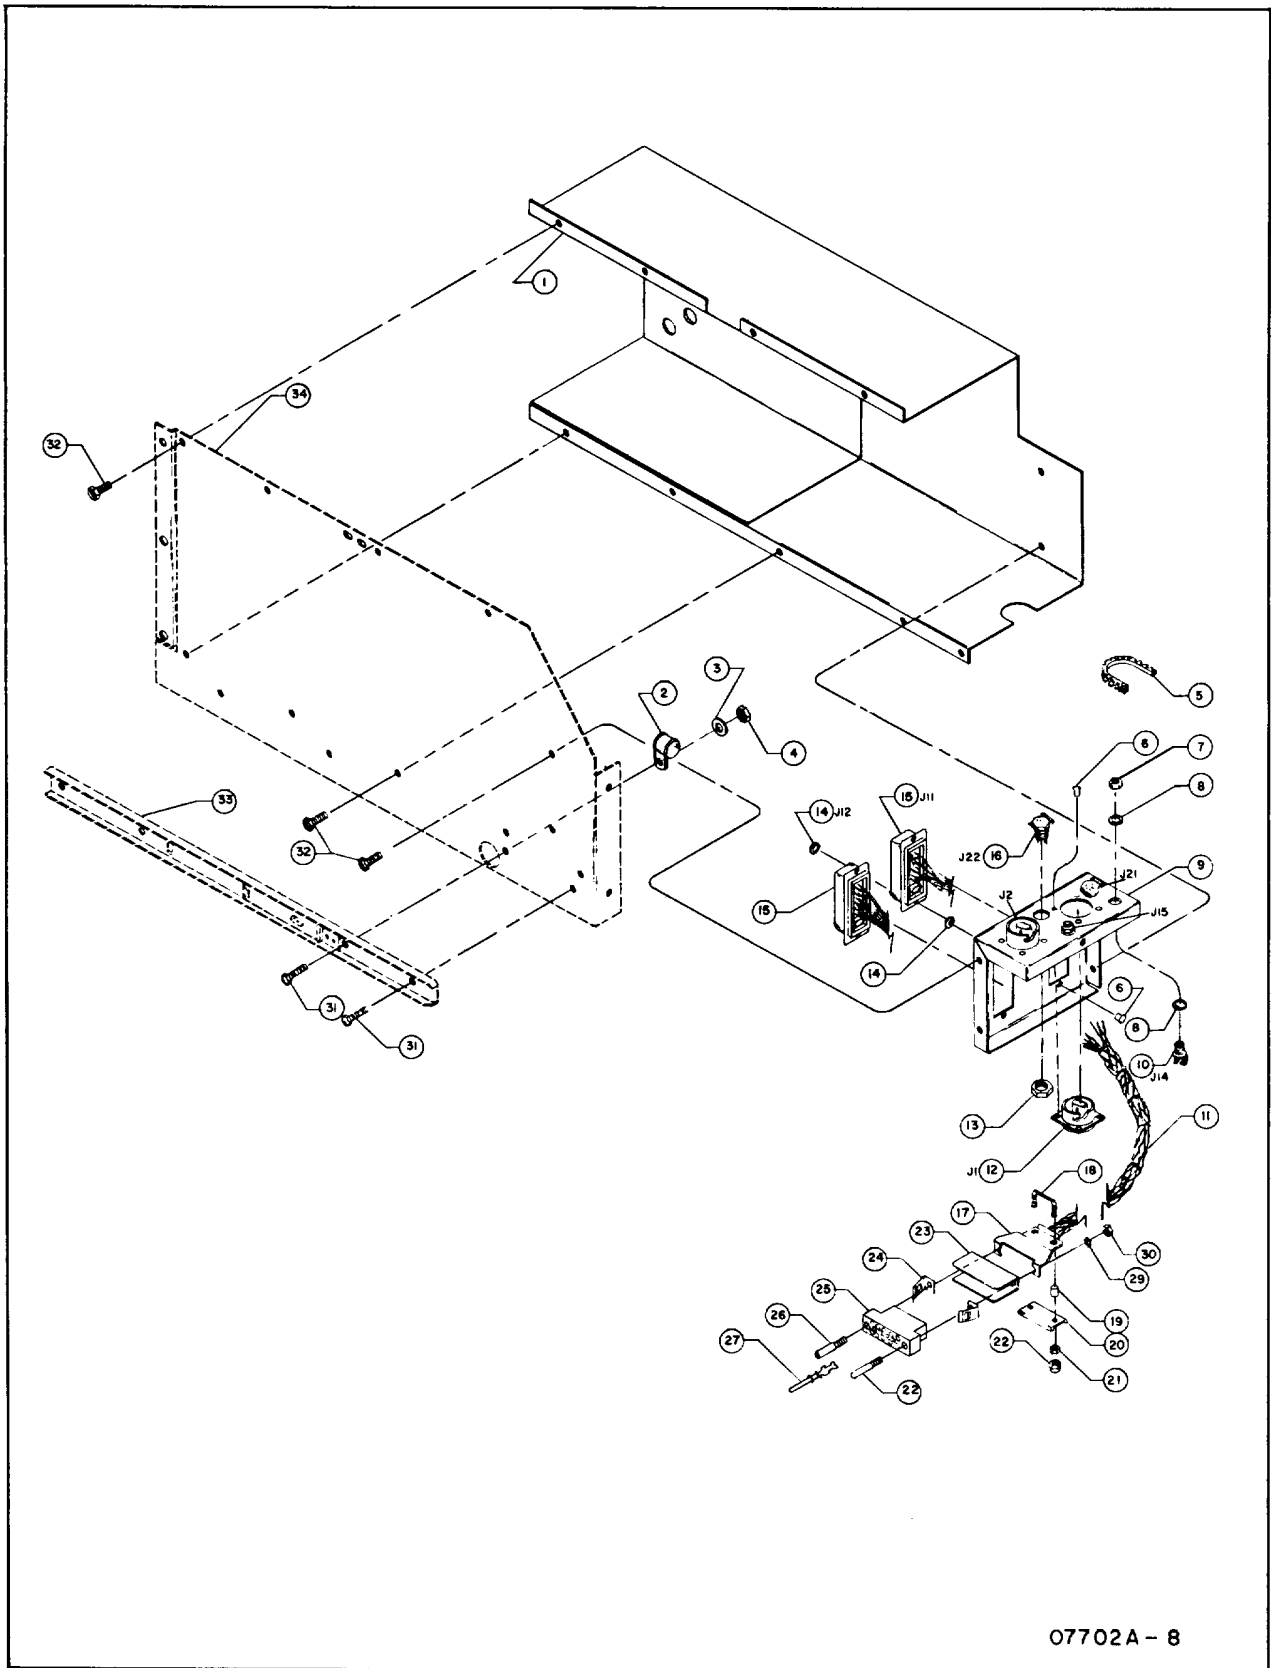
Printed Circuit Board Assembly (07700 - 62010)
